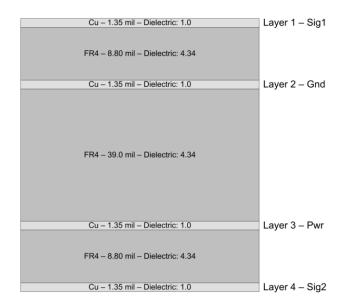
Four Layer PCB Stackup - Cross Sectional View
